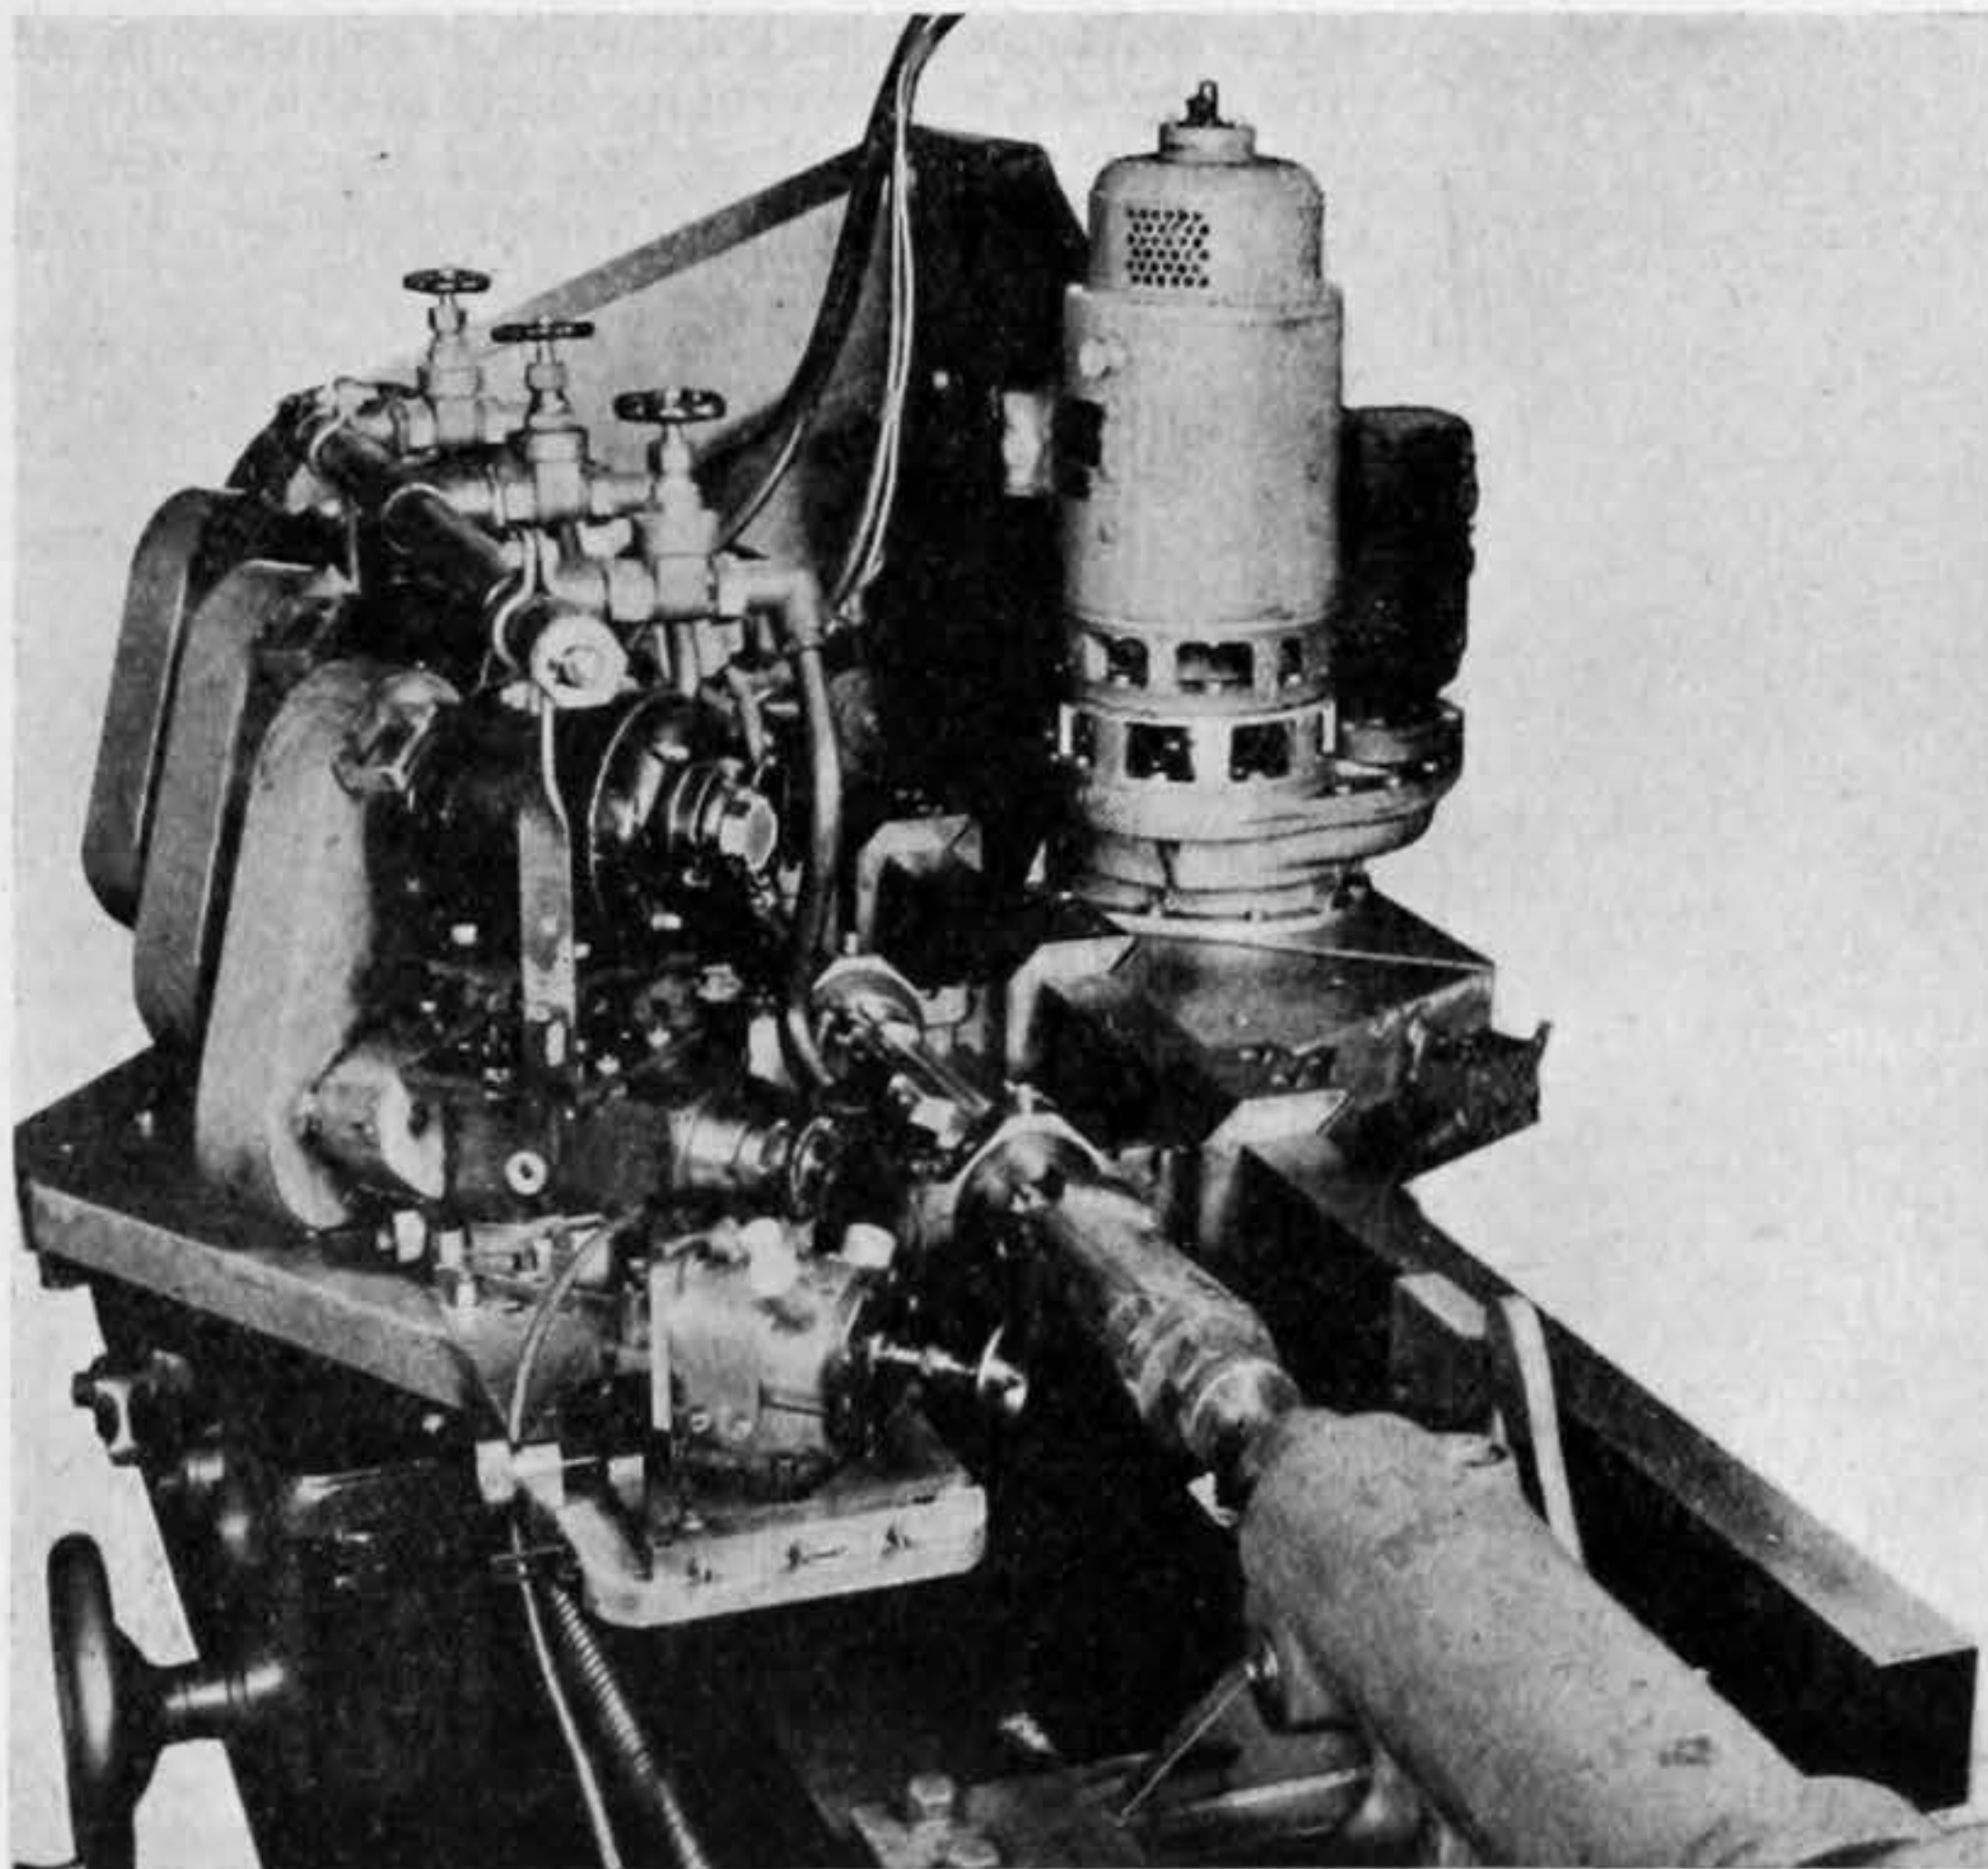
Machining of eccentric workpieces. In this example, three milling cutters are machining nine blocks of high-tensile steel under the control of the tracing head in the foreground
